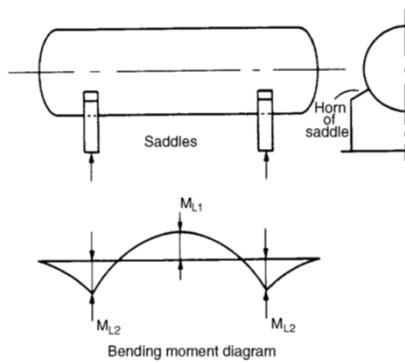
Horizontal cylindrical vessel on saddle supports
